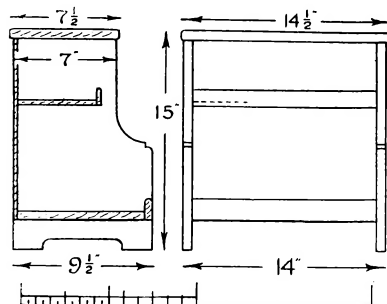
END SECTION AND ELEVATION. FIG. 3. CONSTRUCTION
